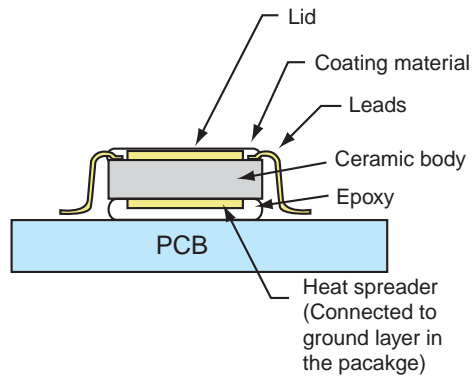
• Top Coating and Bottom Epoxy on CQ Package with Heat Sink on the Bottom
